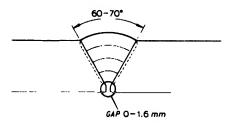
(a) MIG weld in aluminium 5083 (NS8) plate 8 mm thick with 5556 A (NG61) wire. Stainless steel backing bar.
